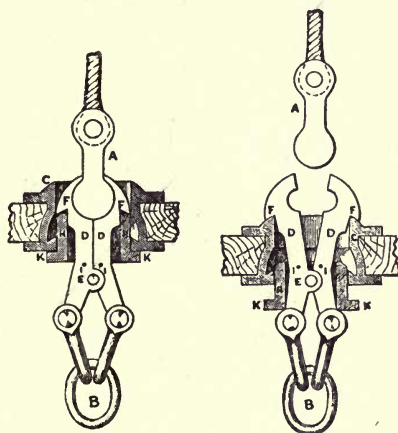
The Walker Detaching Hook for Shaft-hoists.
